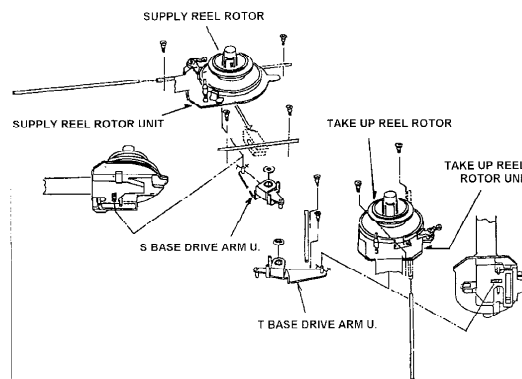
Installation of S & T Reel Rotor Unit
